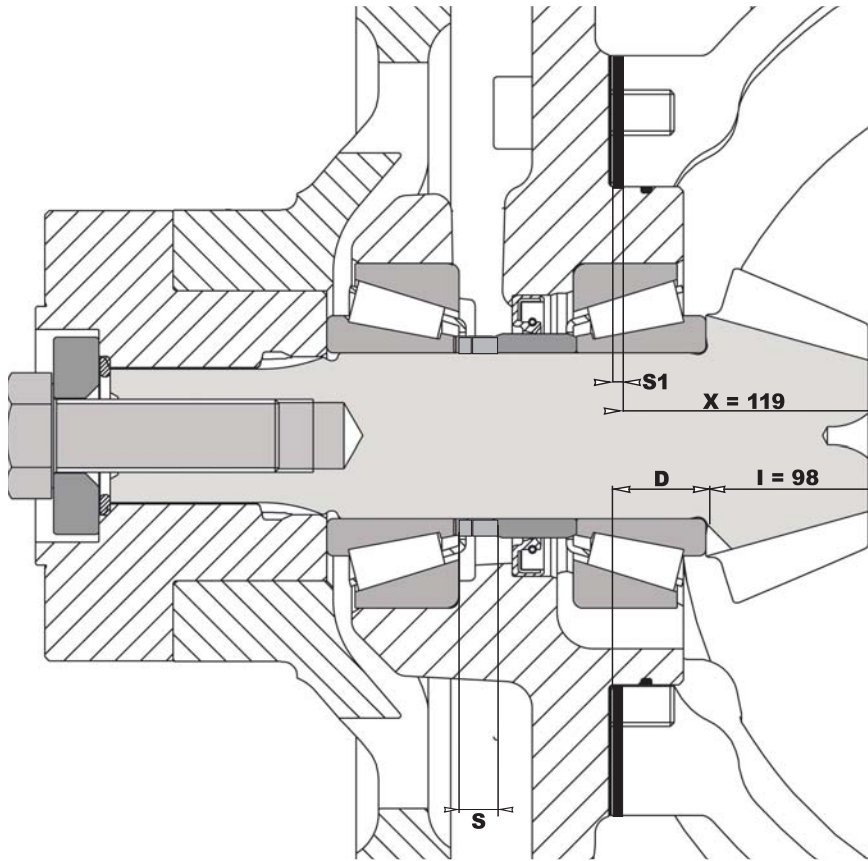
Pinion Housing to Differential Carrier Pinion/Shim Position Drawing
